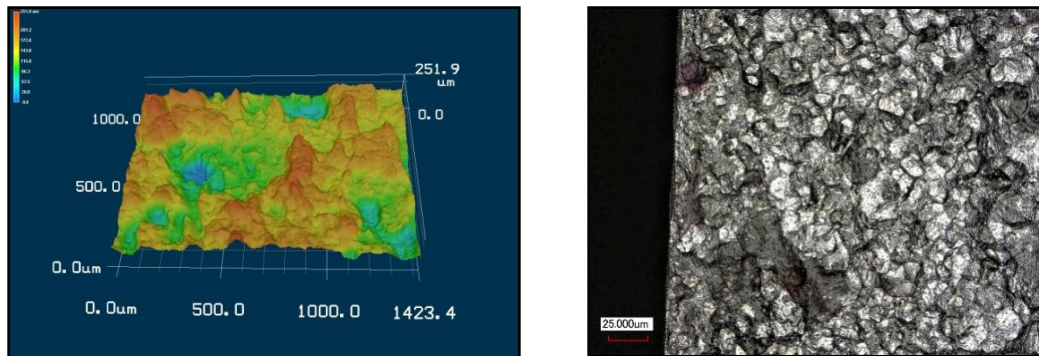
Typical confocal laser microscope images showing surface texture and fracture surface in a gear specimen.
